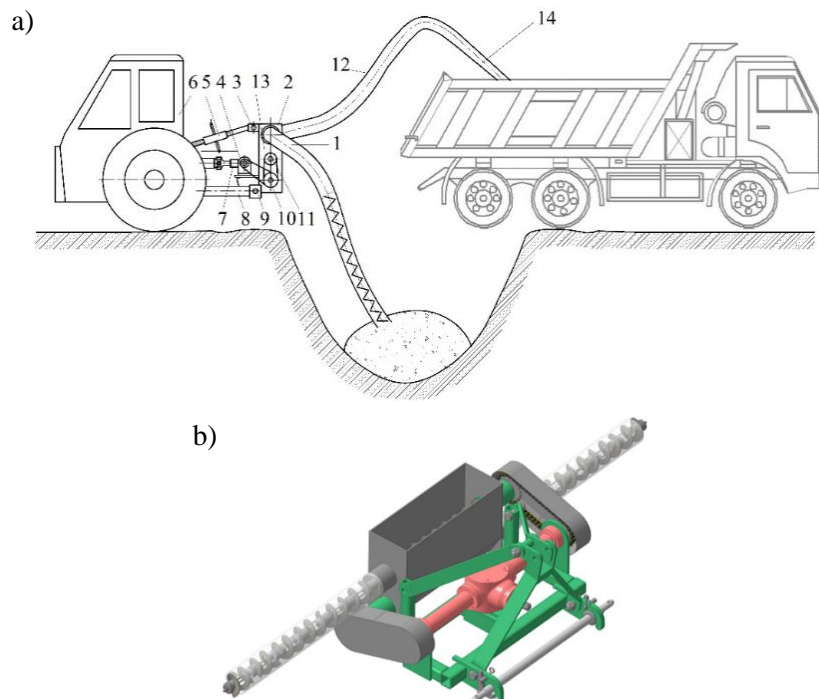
Structural diagram of the experimental setup with a mounted system of a machine-tractor aggregate (a) and a general view of the experimental setup of a flexible screw conveyor (b): 1 – flexible casing for loading; 2 – reloading pipe; 3 – upper bracket; 4 – gearbox shaft; 5 – central rod; 6 – machine-tractor aggregate; 7 – cardan transmission; 8 – lower bracket; 9 – output shaft; 10 – sprocket; 11 – intermediate shaft; 12 – unloading flexible casing; 13 – sprocket; 14 – longitudinal rod
